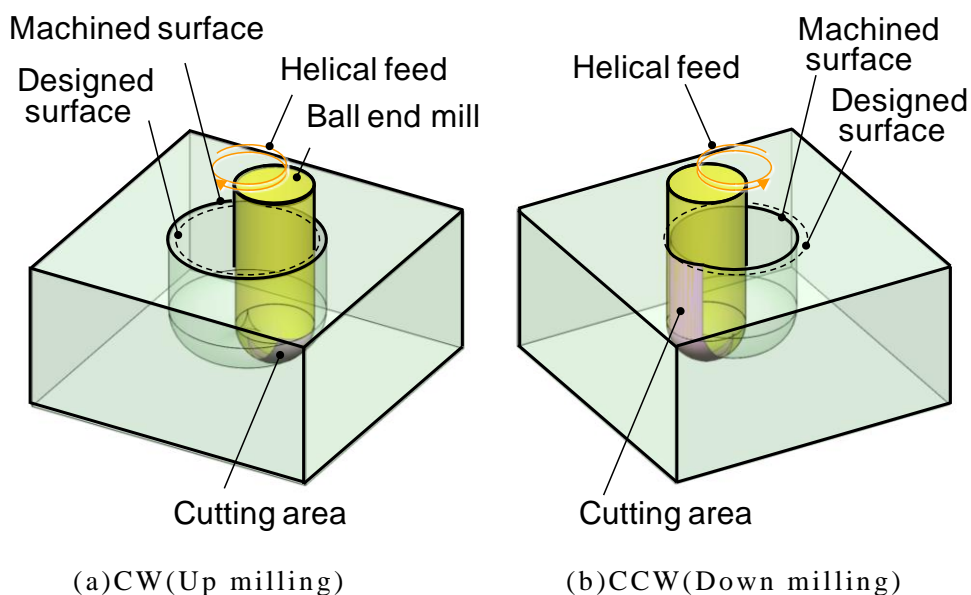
51 Change in cutting area in helical milling due to the deformation of ball end mill.
